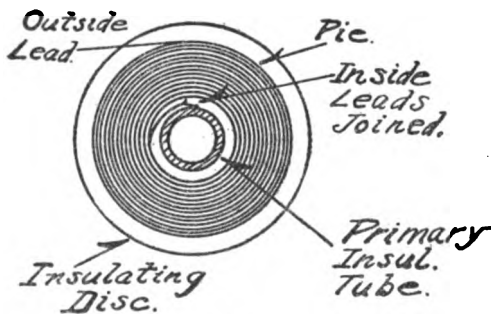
A.—SECTIONAL VIEW OF A SECONDARY UNIT
